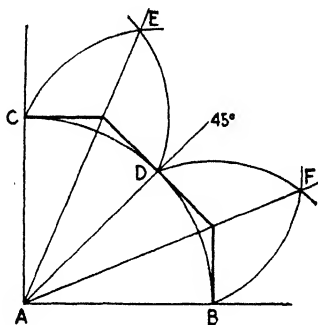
Center line for a three-piece 90-deg. elbow.
